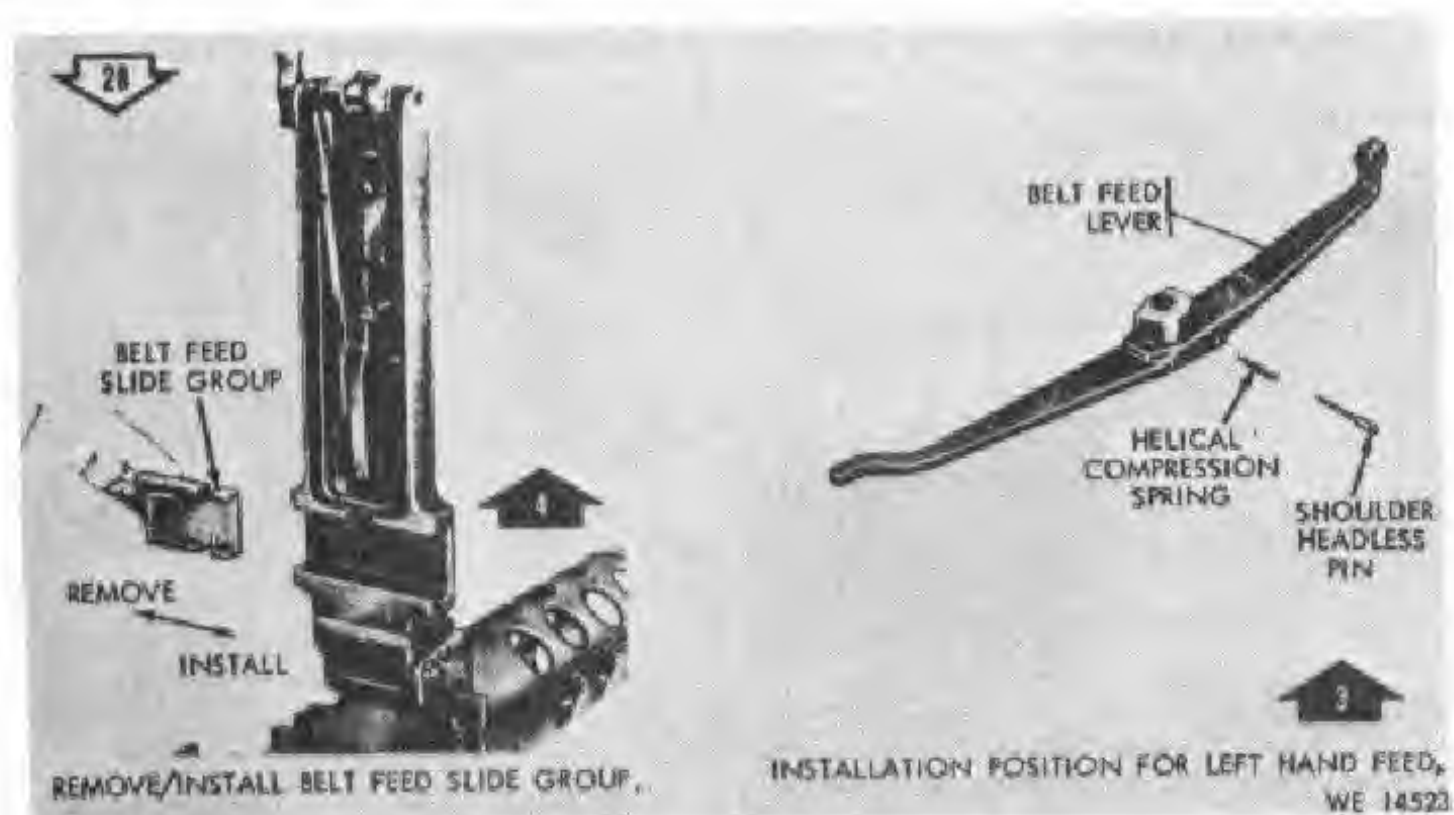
Disassembly/assembly of Caliber .50 Machine Gun, M2. (19 of 20)
